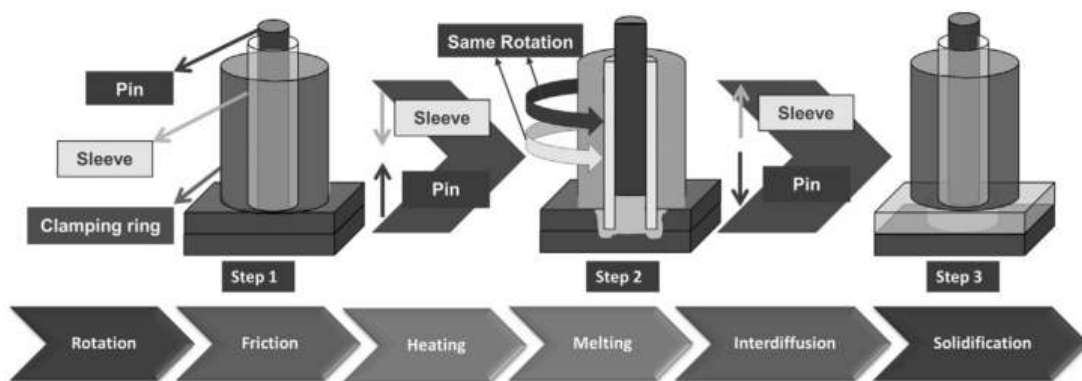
Illustration of the FSpW process, showing the tool and the main steps [58]
